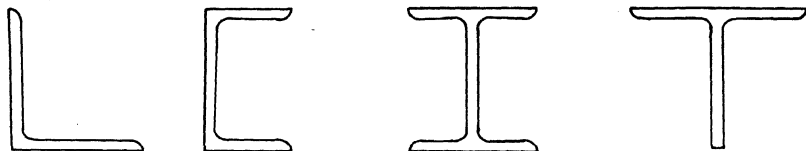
TYPICAL EXTRUDED ALUMINUM ALLOY SECTIONS
